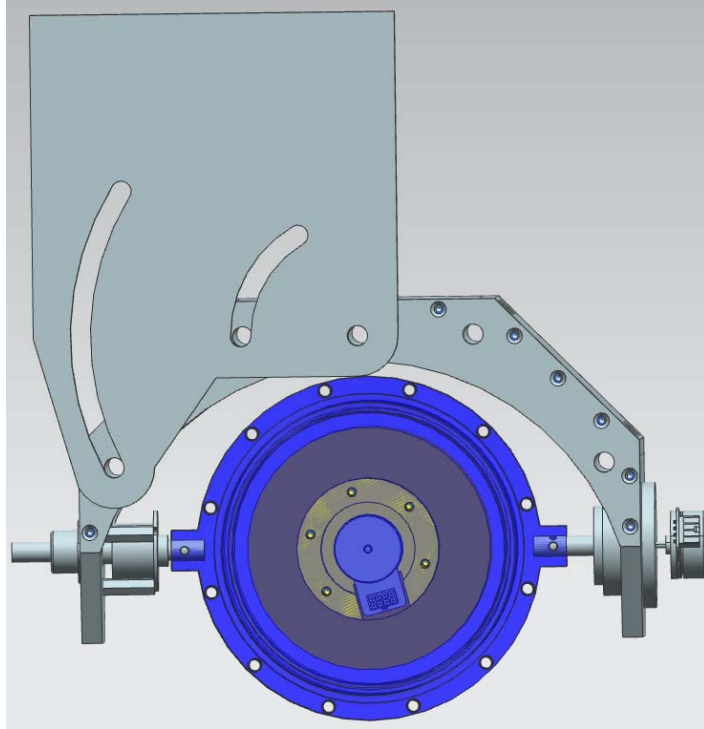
First gimbal frame and mount base prototype, 90° skew angle
